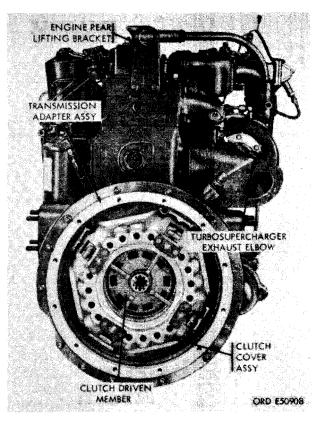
EARLY MODEL LDS -427 ENGINE ASSEMBLY - REAR VIEW.
